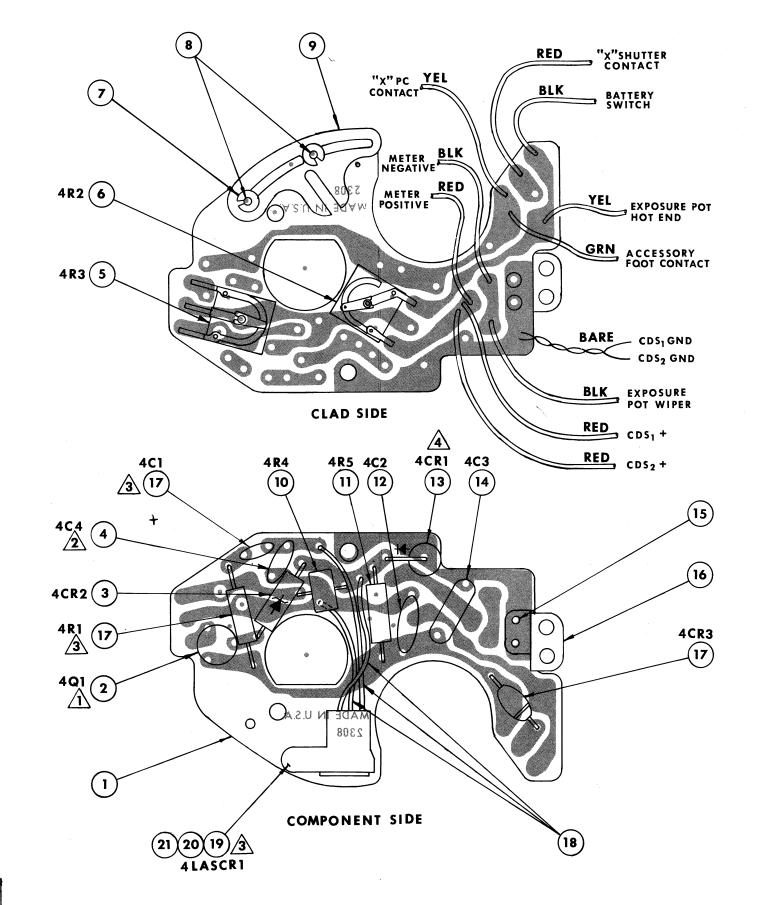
Circuit Board Assembly -Spotmatic IIa Camera
